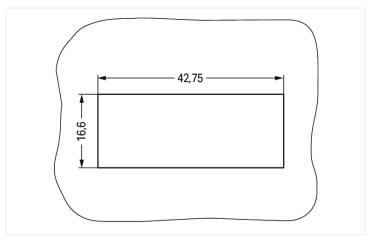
Plate thickness: 1 ... 3 mm Cutout tolerance: + 0.1 mm
